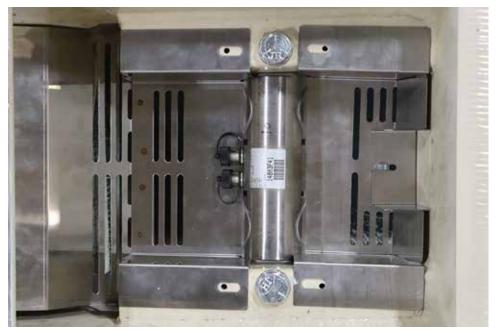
Outer load cell guard installed and positioned over threaded holes.
